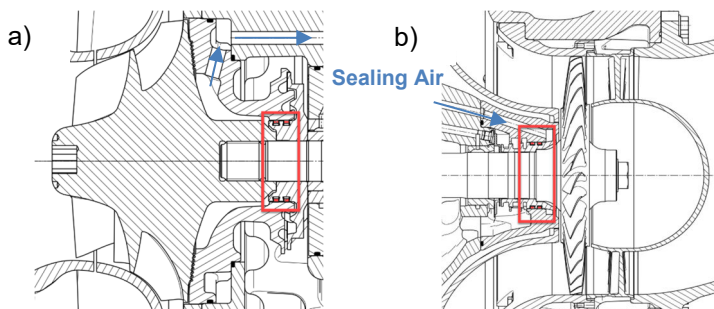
Sealing Arrangement a) compressor side b) turbine side
